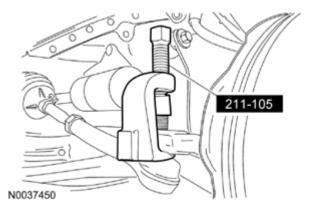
Separating Tie-Rod Ends From Steering Knuckles Using Tie-Rod End Remover (211-105) Courtesy of FORD MOTOR CO.
